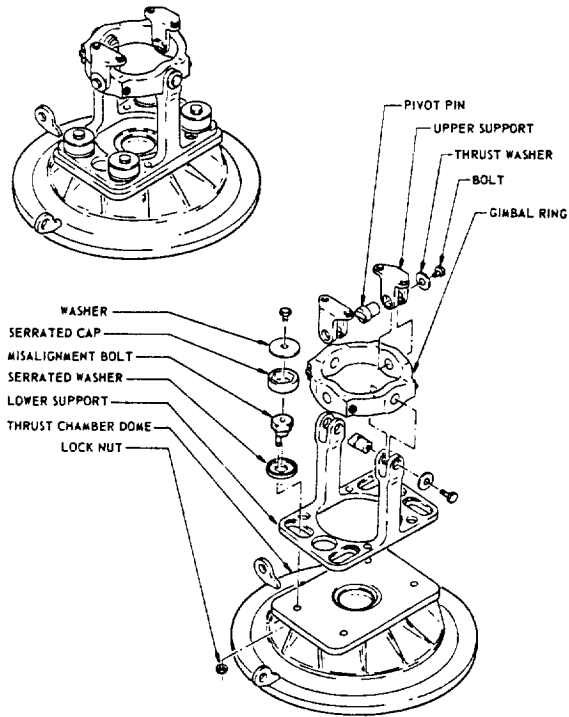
Typical ring-type gimbal mount designed for low-thrust, upper stage engine applications.
